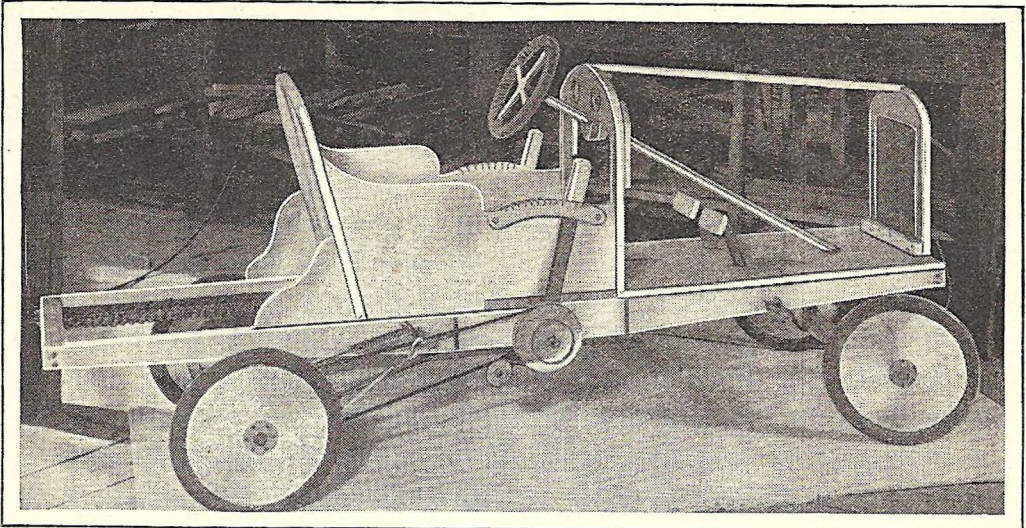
Ready for covering. Note positions of clutch and brake pedals in front and control lever at side.
